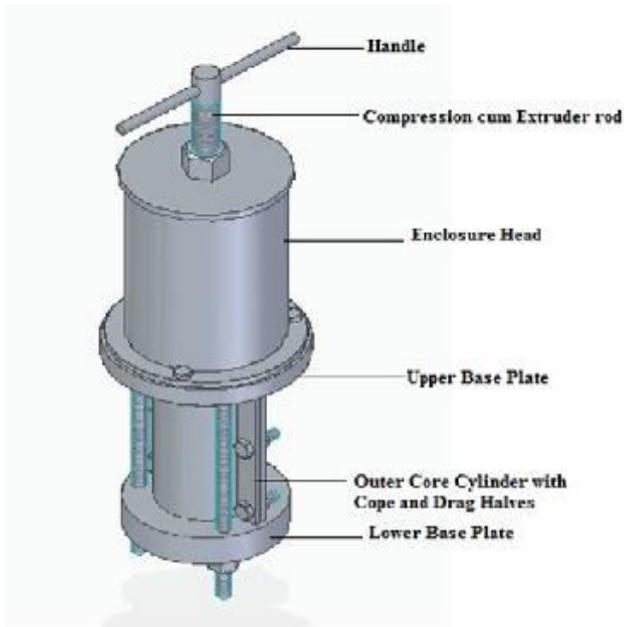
Three Dimensional representation of Compression Cum Extruder Die Type Equipment
